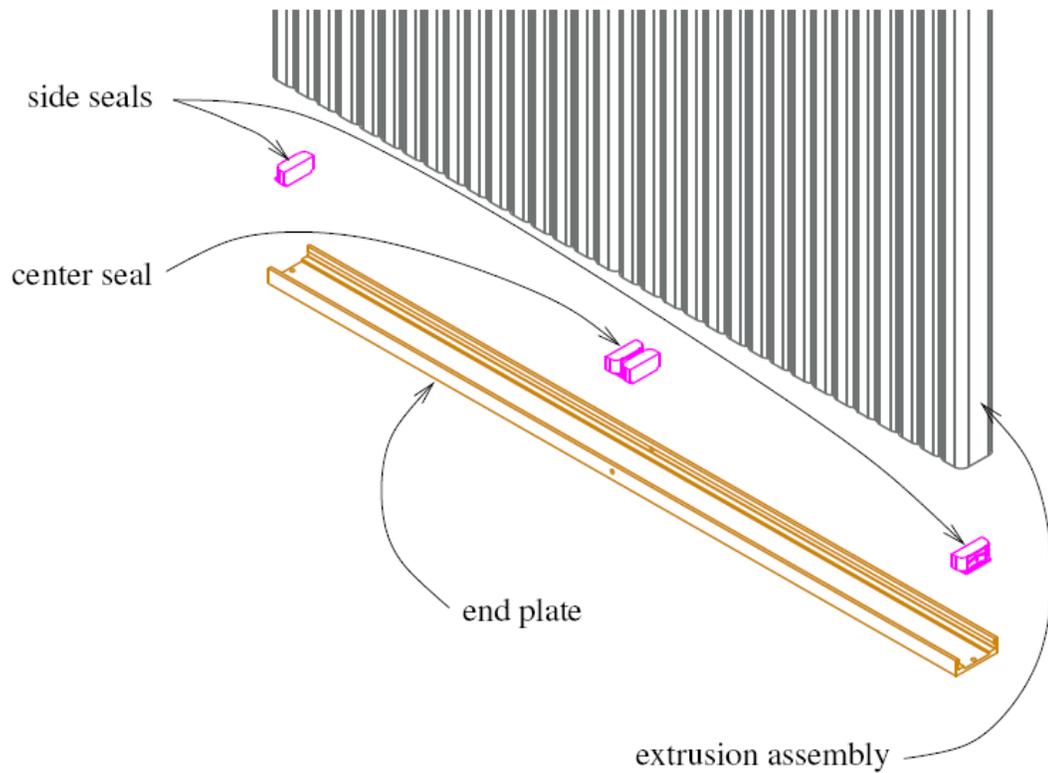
Exploded view of the end plate as it attaches to the extrusion assembly.
